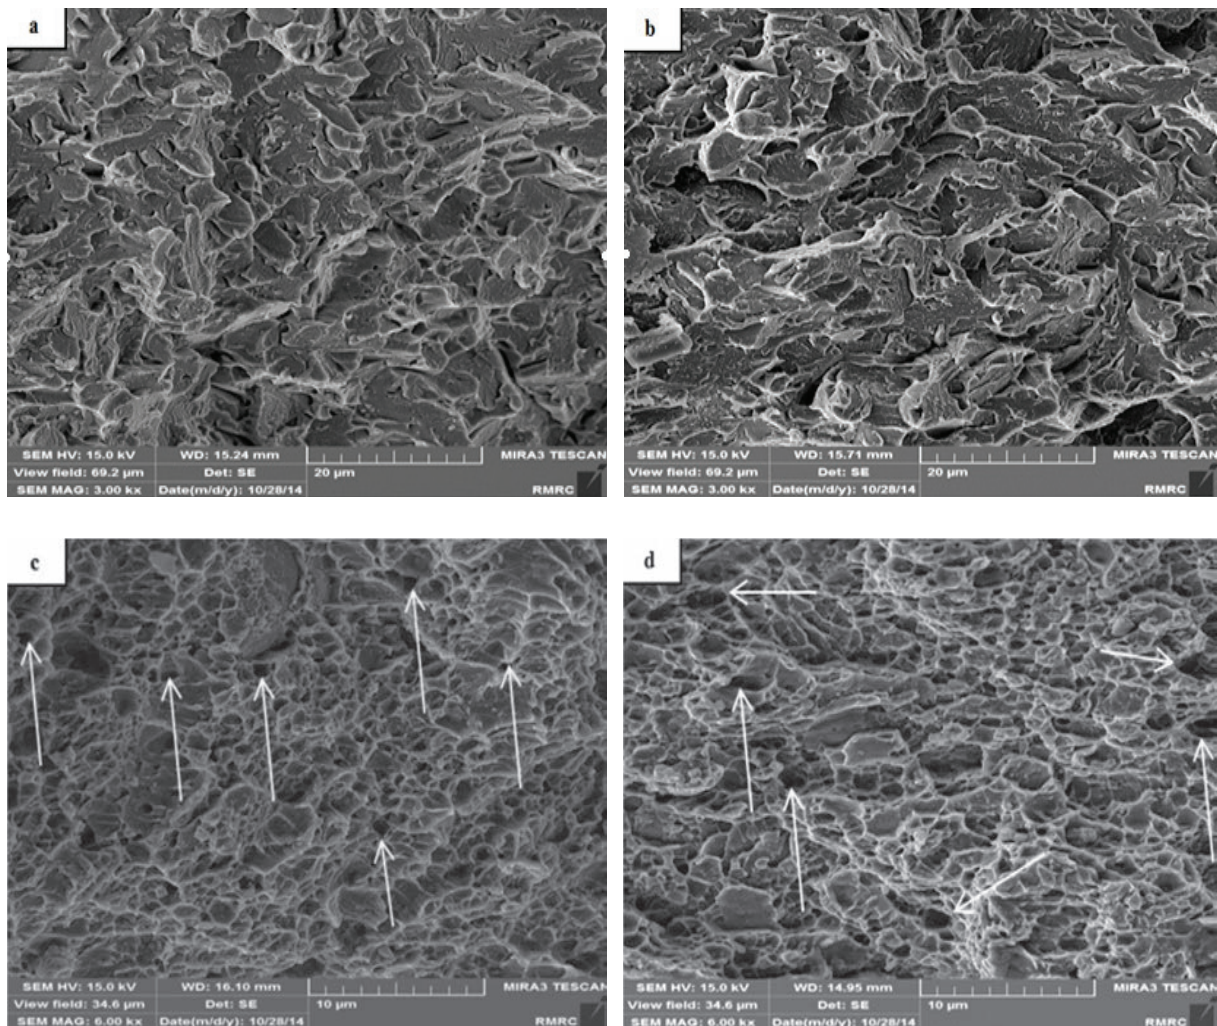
The fracture surface of DIN 1.4021 martensitic stainless steel samples after heat treatment a) QT-1, b) QT-2, c) QT-3 and d) QT-4.
